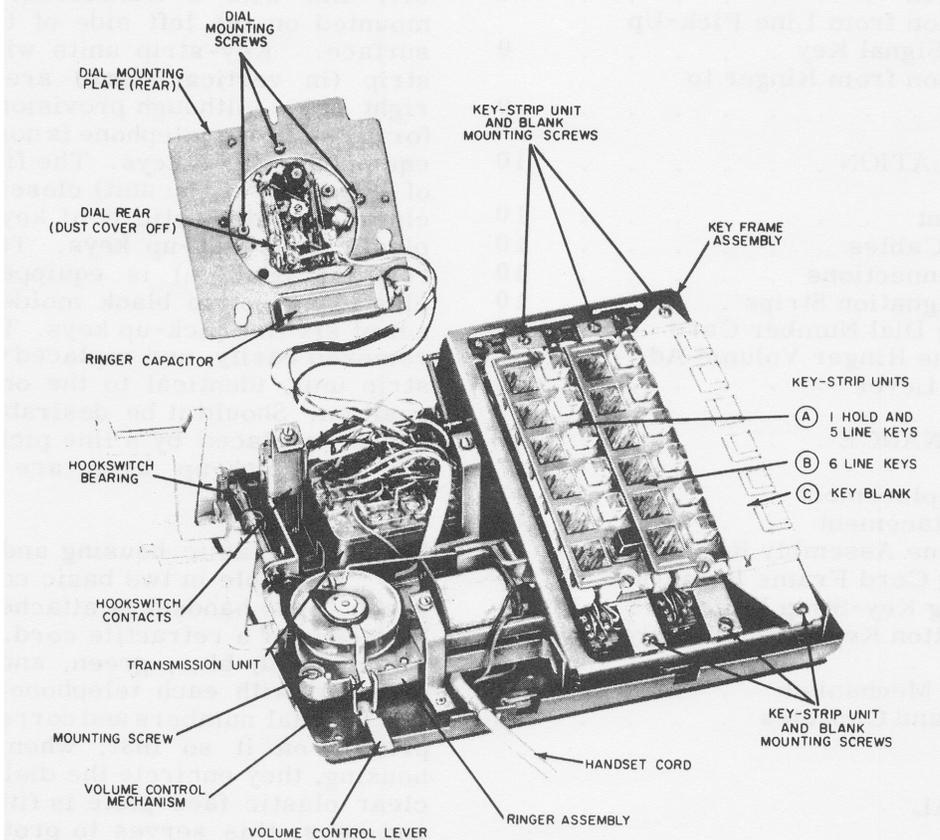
Type 860A Telephone with Housing Removed, and Dial Assembly Raised and Inverted.
